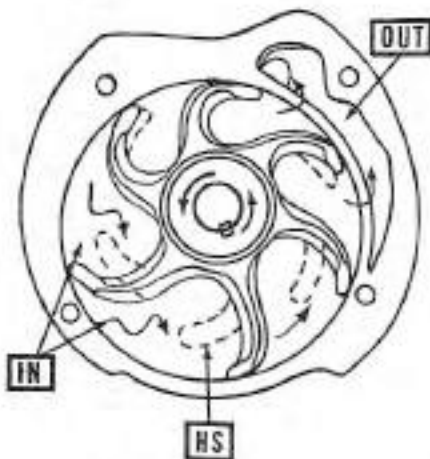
Schematic view of the rubber impeller type water pump used for cooling and for the automatic boiler unit. Impeller blades flex at slow speeds as shown by solid lines. The offset housing causes water to be drawn into pump body (IN) and forces water out (OUT) due to difference in area between blades. At high speeds, blades remain curved as shown by broken lines (HS) and pump operates by centrifugal action.
